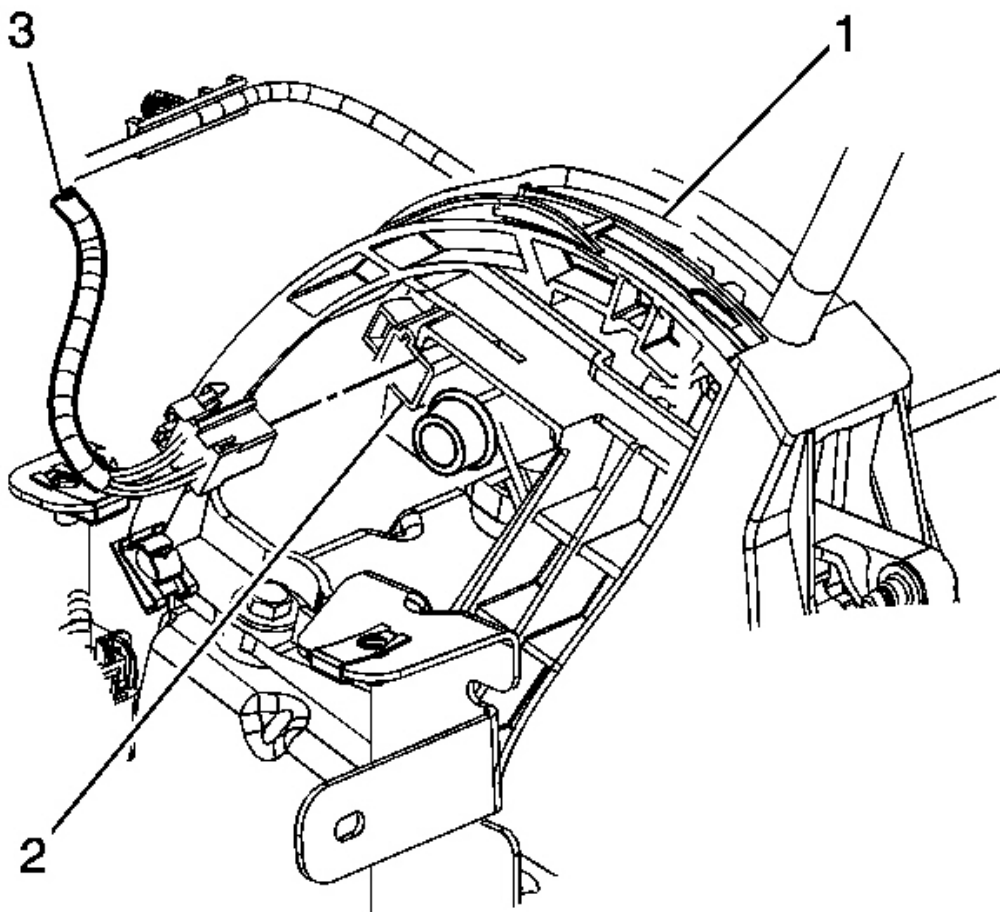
View Of Shift Lock Actuator Electrical Connector
